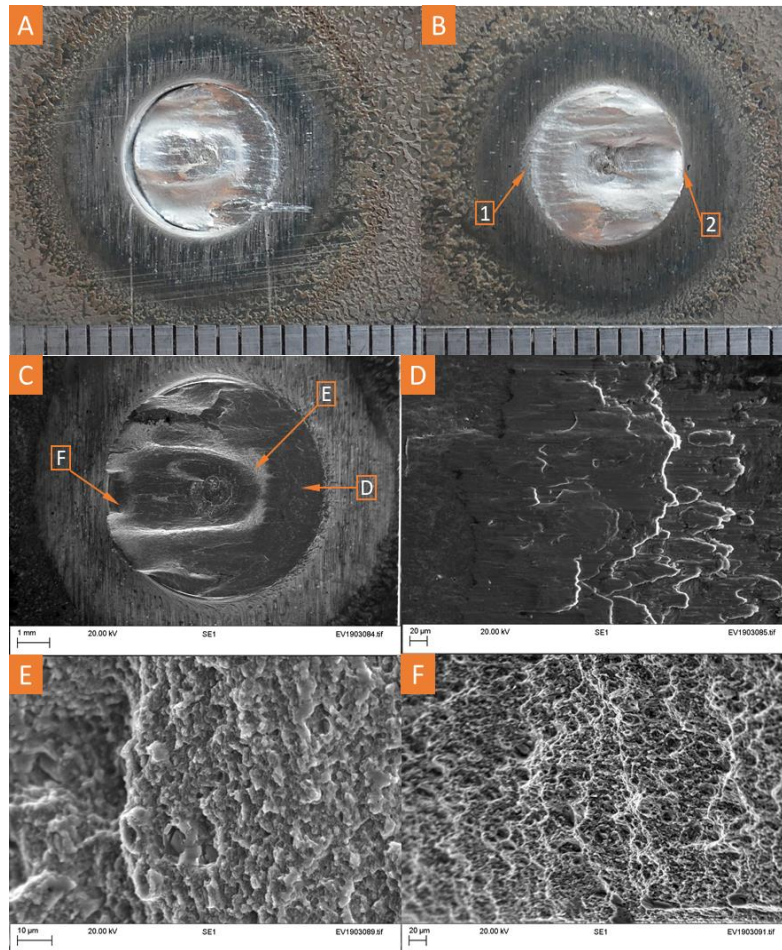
Fracture surfaces of RFSSW AA7075-T6 condition W21 with sealant (RS = 1000 rev/min; PD = 2.4 mm):
